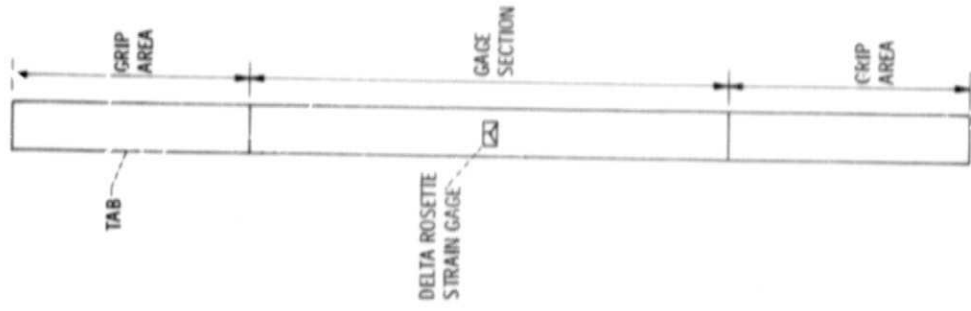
Schematic of specimen geometry and strain gage arrangement.
